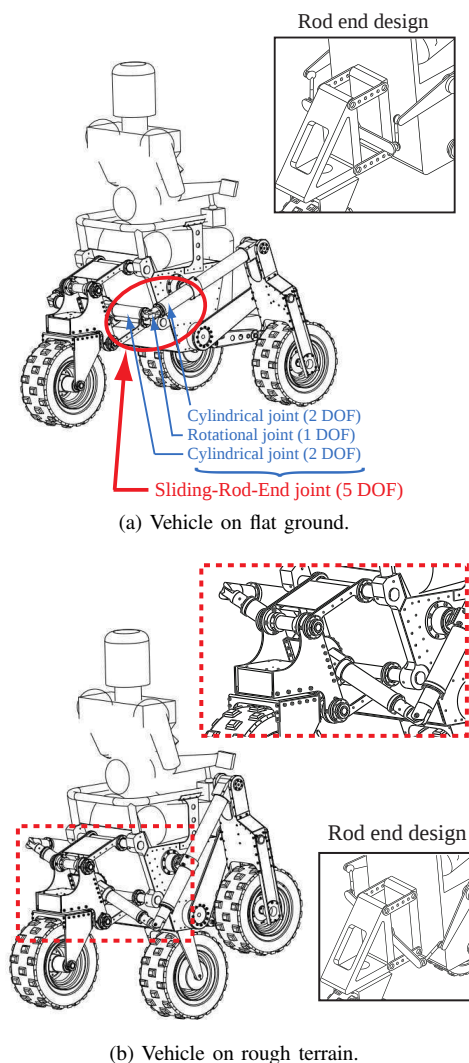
Replacement of the rod ends with the proposed sliding-rod-end joint.
